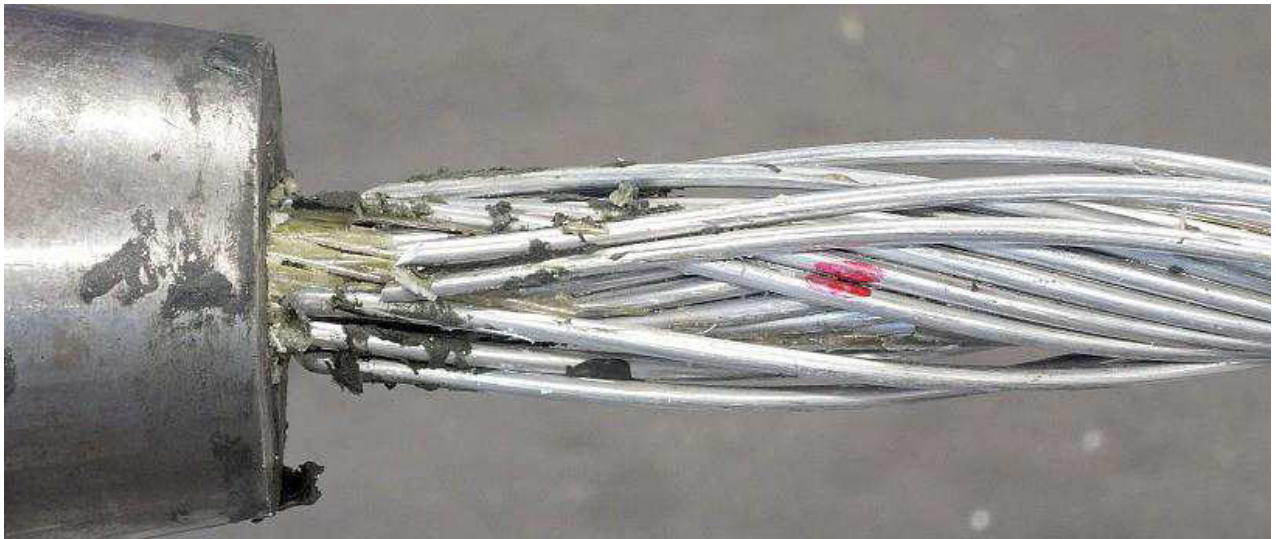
Breakage of outer layer aluminium wires in one end clamp
